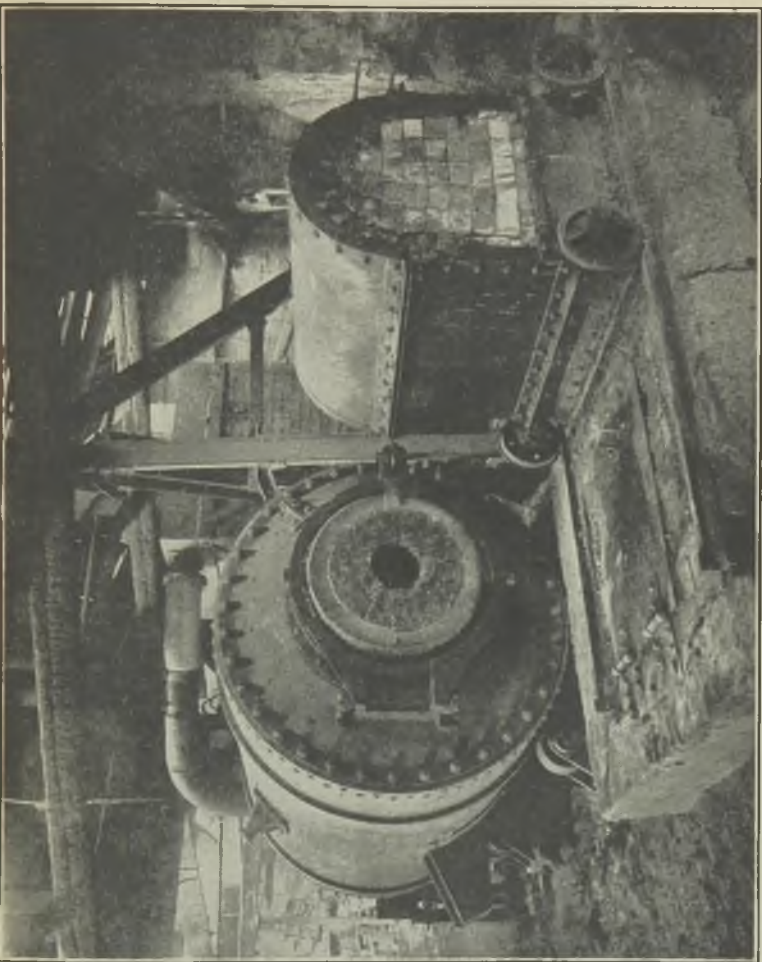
THE FURNACE WITH EXHAUST ELBOW REMOVED FOR CHARGING.
